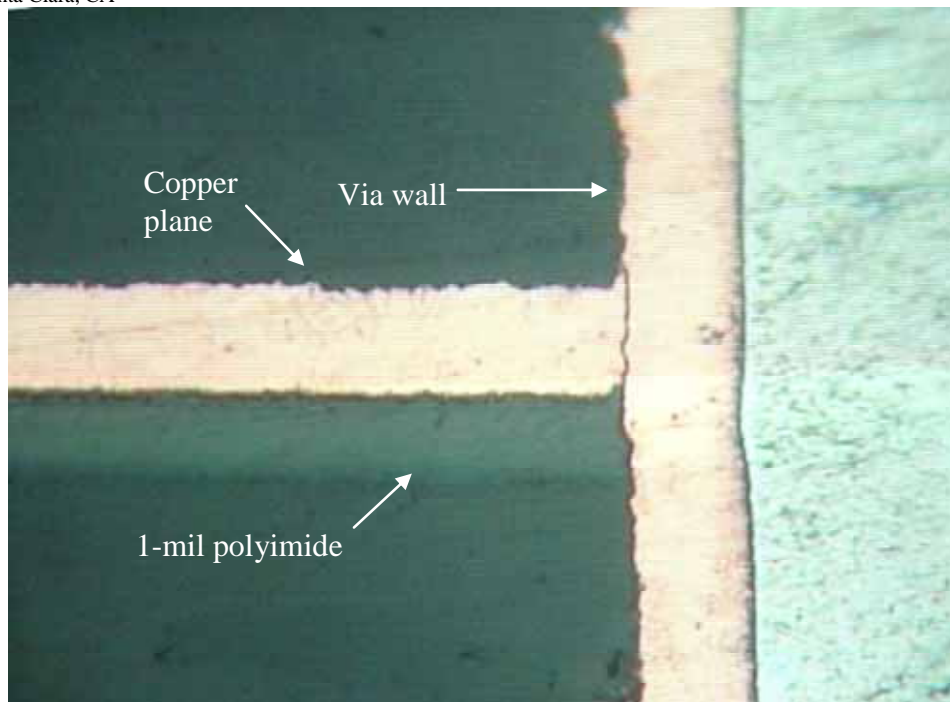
1-mil HK04 laminate and via joint after 6x solder shock. Photo courtesy of Benchmark.
